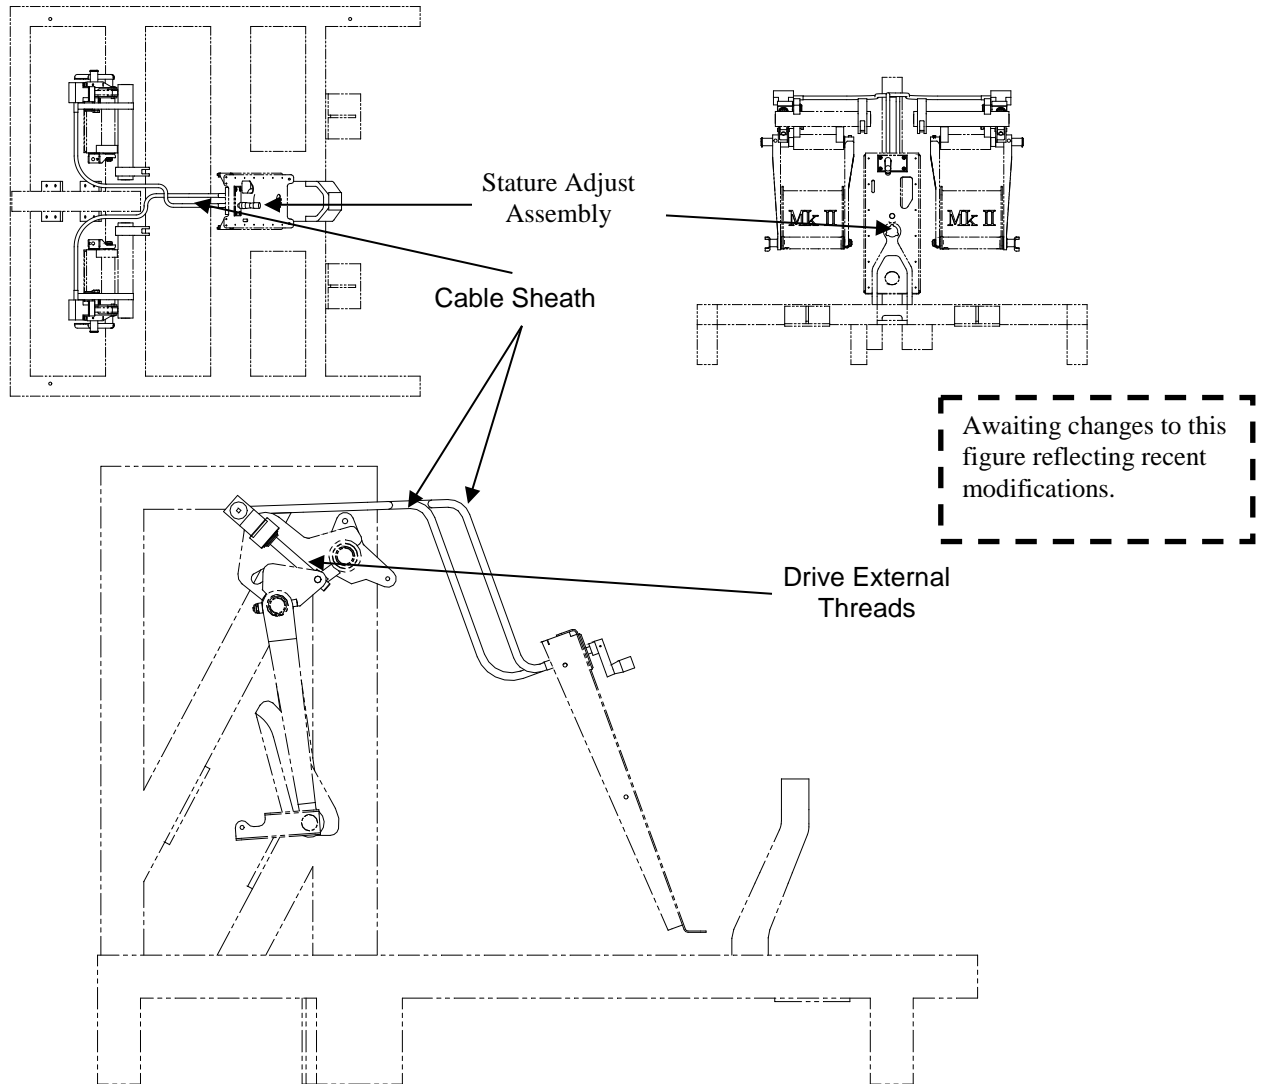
Rudder Pedal Stature and Mechanical Assemblies
